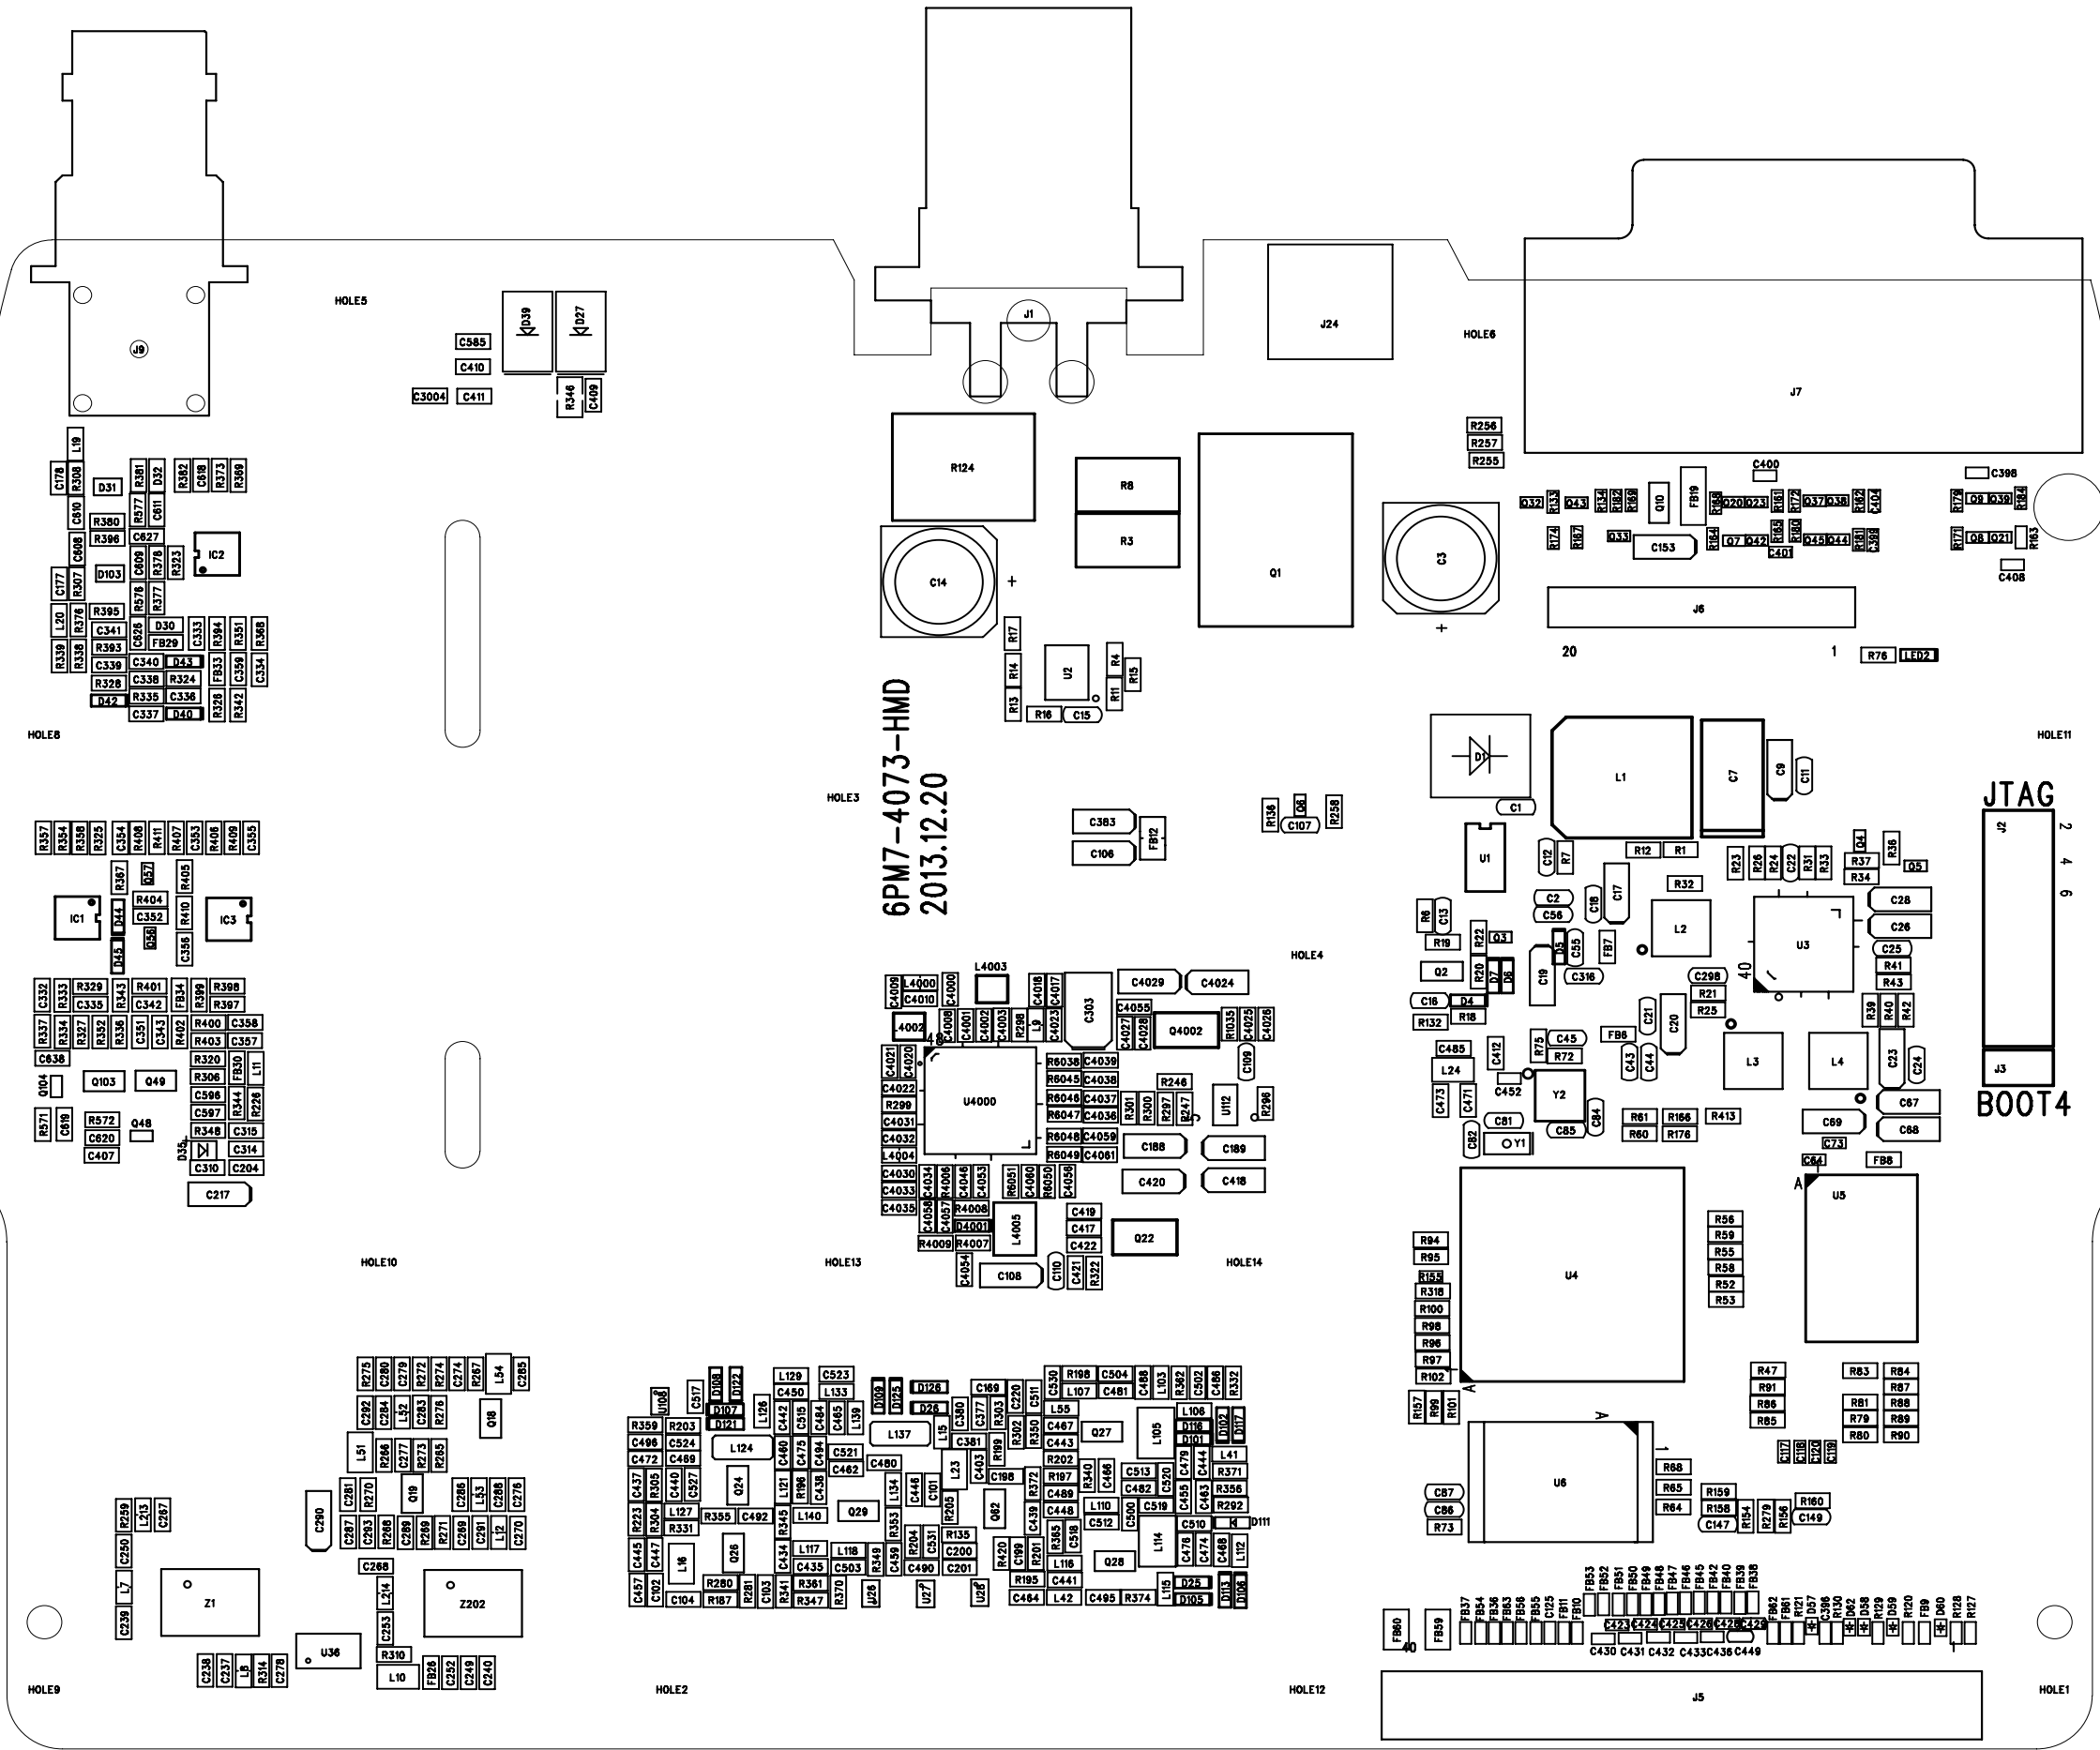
TM840 400-470MHz Keypad Board Bottom Side PCB View
